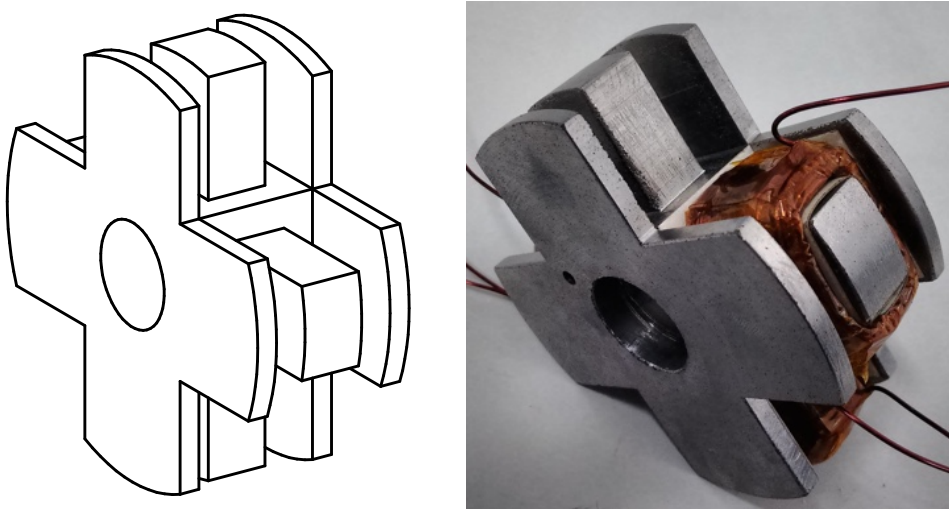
Illustrative and photographic view of internal-stator homopolar magnetic bearing stator used in test rig. The bearing is fabricated from a Soft Magnetic Composite material
